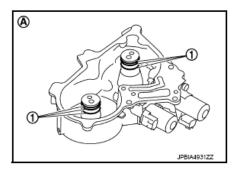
Identifying Seal Rings Shaft Grooves Courtesy of NISSAN NORTH AMERICA, INC.
